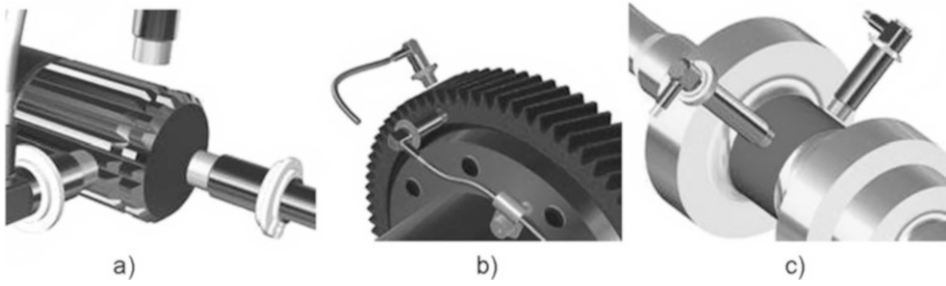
(a) Testing rotating shafts for imbalance, out-of-roundness, radial or axial runout and vibration (source: Waycon); (b) Toothed wheel inspection (Source: Waycon); (c) Machine monitoring (Source: Waycon)
